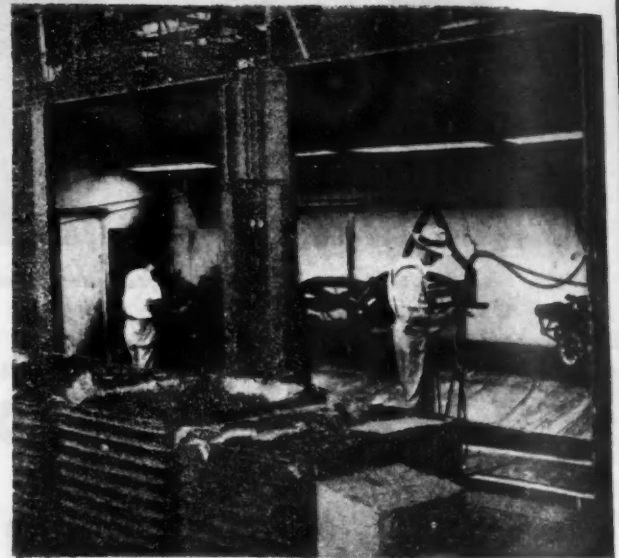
Suspending the chassis from an overhead conveyor during painting eliminates messed-up chains and trolleys
